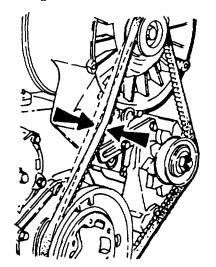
Checking V-Belt Deflection (Belt Guard Removed)
